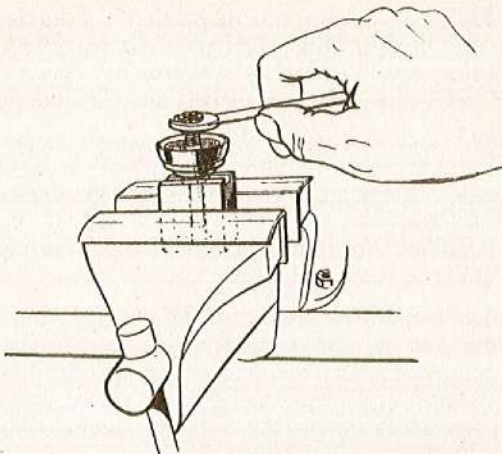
Use of locally made block for dismantling and assembling reducing valve plunger assembly
